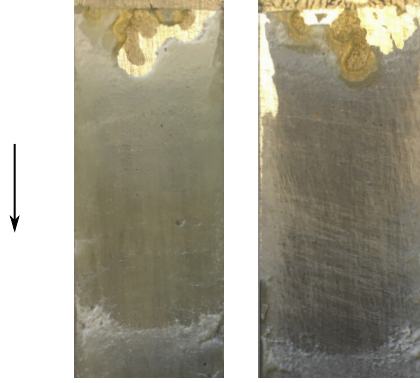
Failure surface of specimen Araldite<sub>52</sub>. Arrow shows the crack propagation direction.
